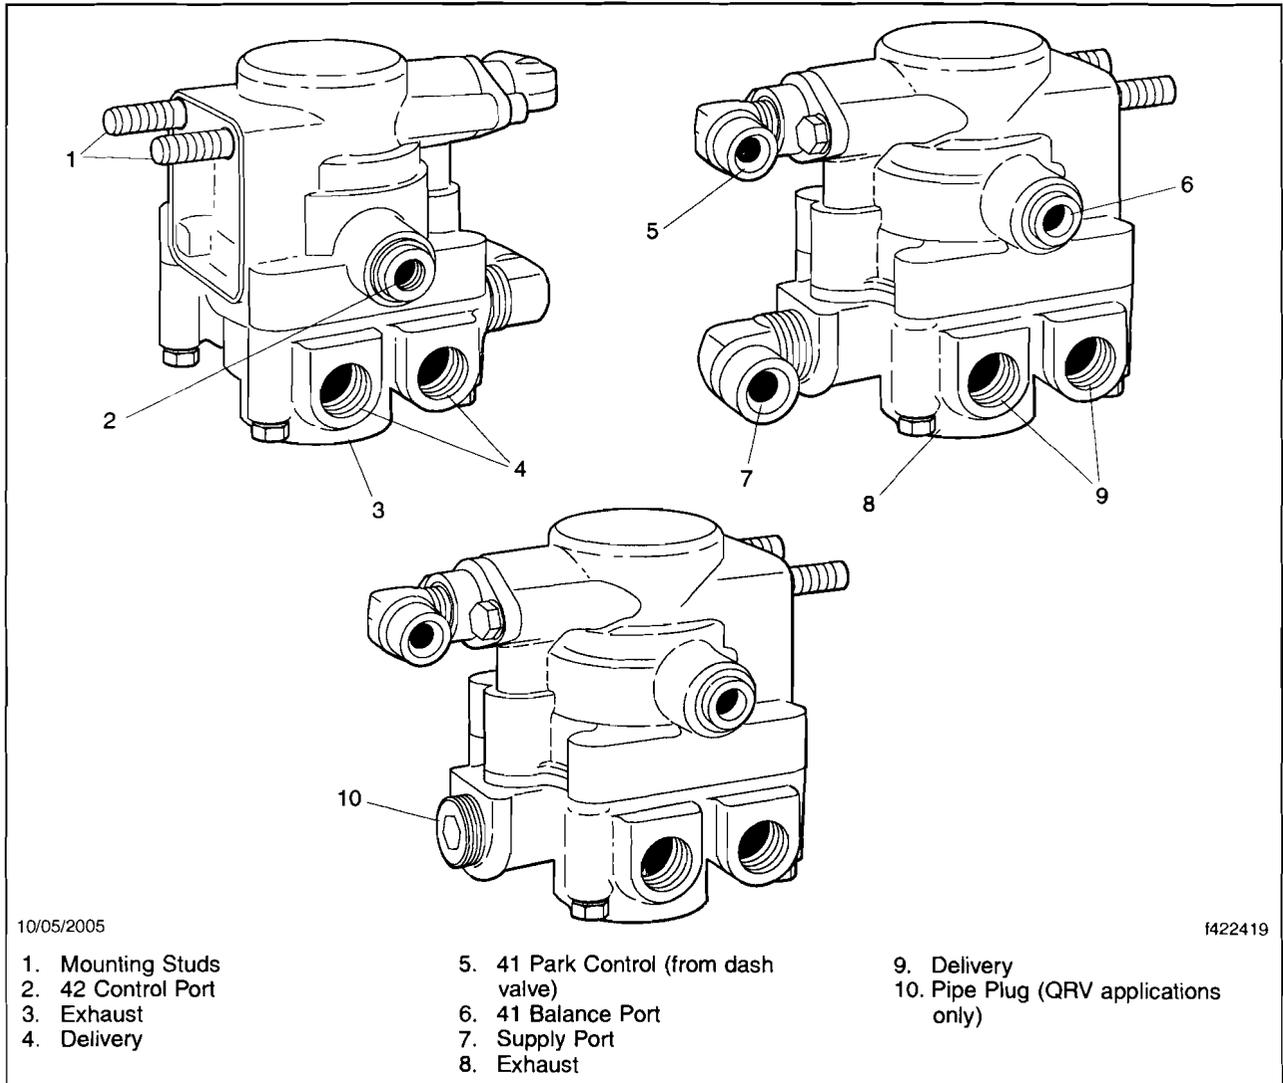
, SR-7 Spring Brake Modulating Valve (exterior views)
